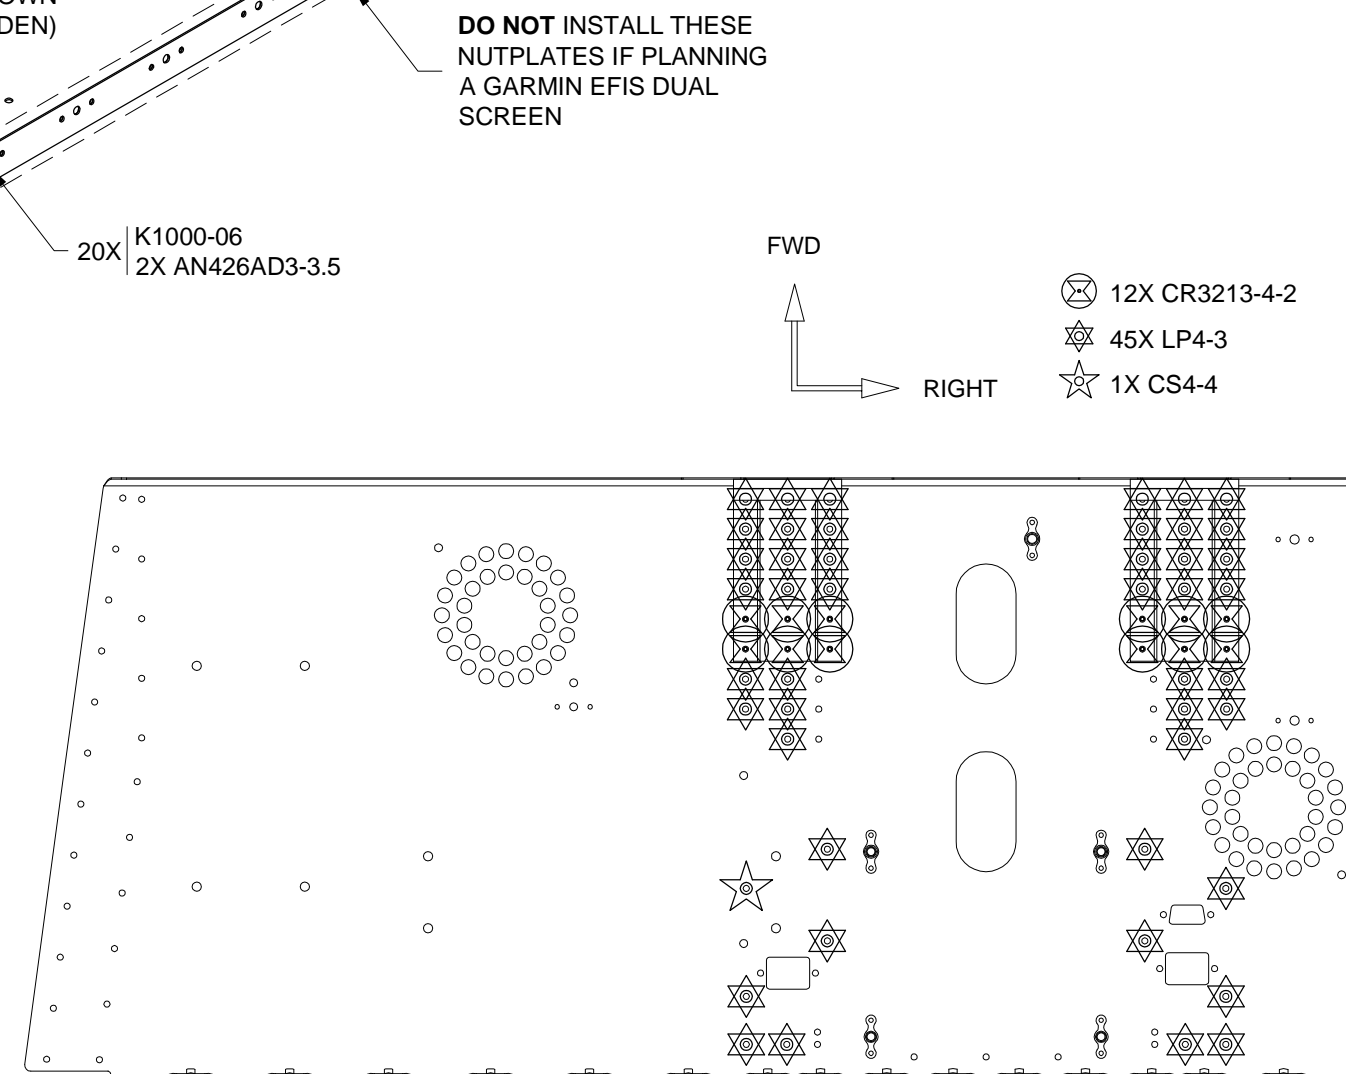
PANEL BASE CHANNEL RIVET DIAGRAM
